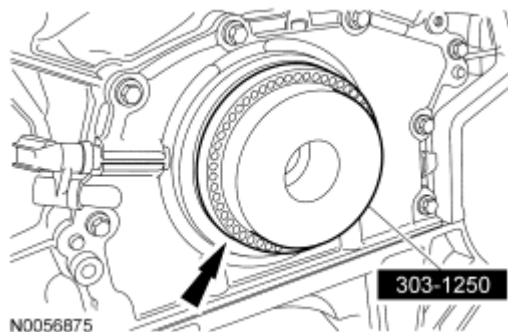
Positioning Special Tool (303-1250) Onto End Of Crankshaft
